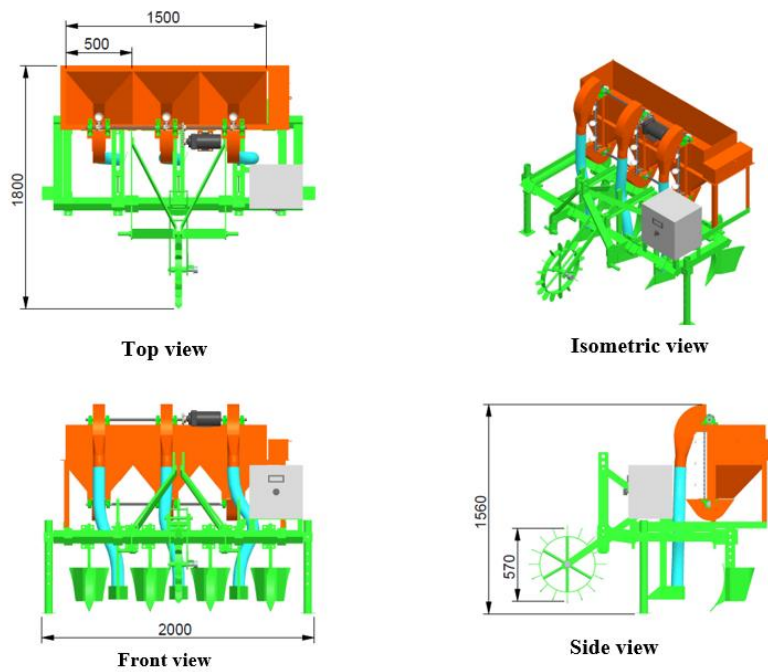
Side view of a sensor-based tractor drawn ginger planter
